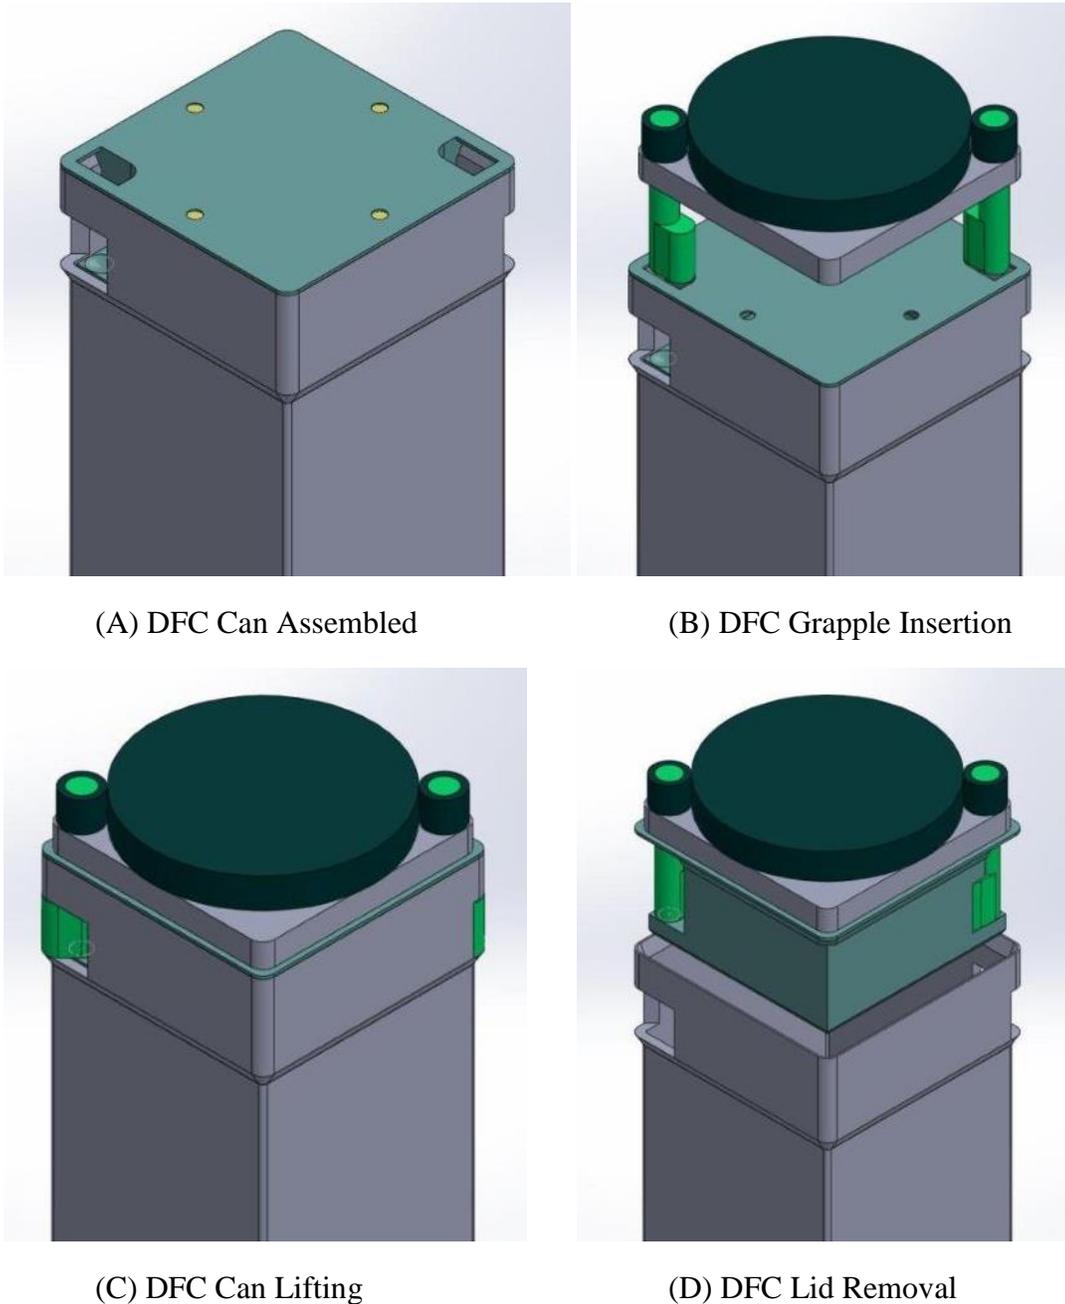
Damaged Fuel Can Assembly for PWR Fuel
